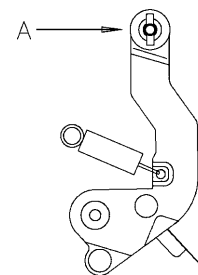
Removal of tension band when measuring the rewinding playback (VS-REW) winding torque
